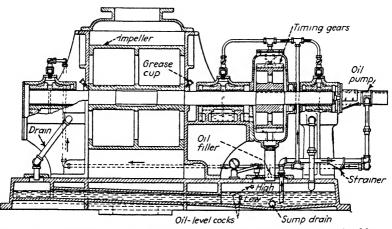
Ring-oiled sleeve bearings and grease-lubricated shaft shoulders. (Courtesy of Power.)
